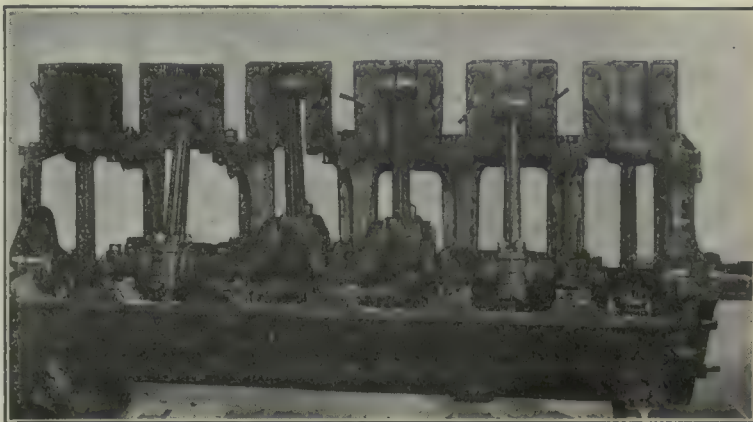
CRANKSHAFT RUNNING-IN FIXTURE
